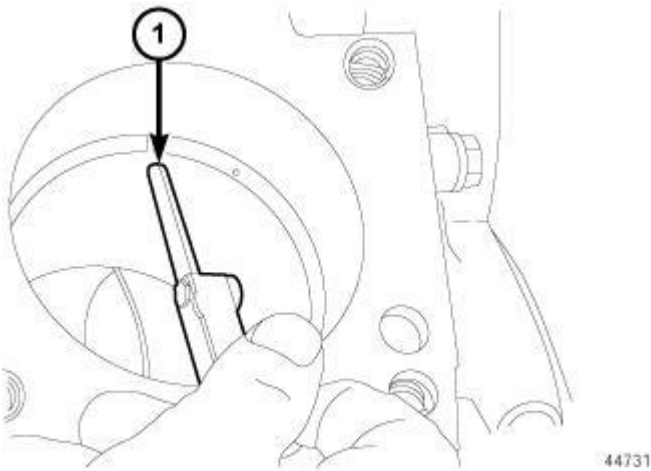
Checking Piston Ring End Gap Using Feeler Gauge
